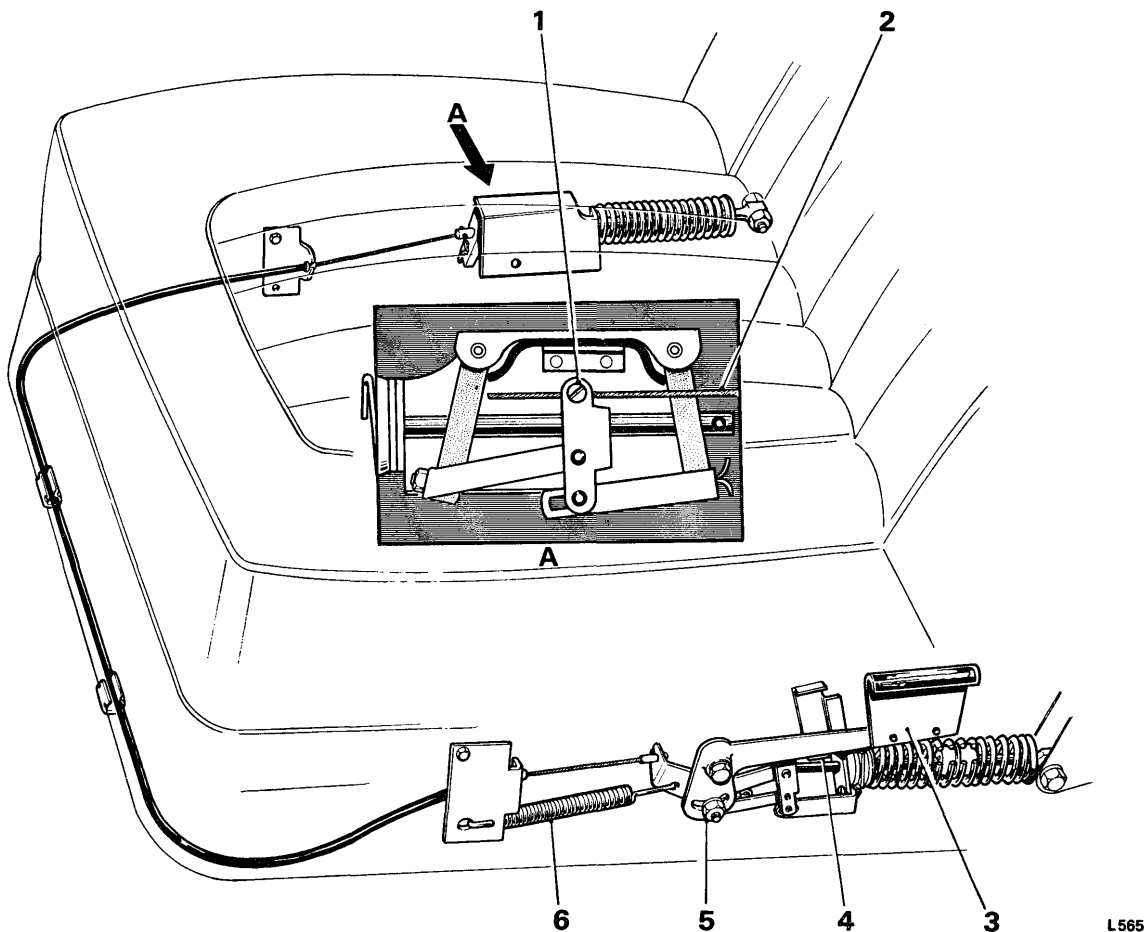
FRONT SEAT RAKE MECHANISM (Later 4-Door Saloon and Long Wheelbase Non-division Cars)
